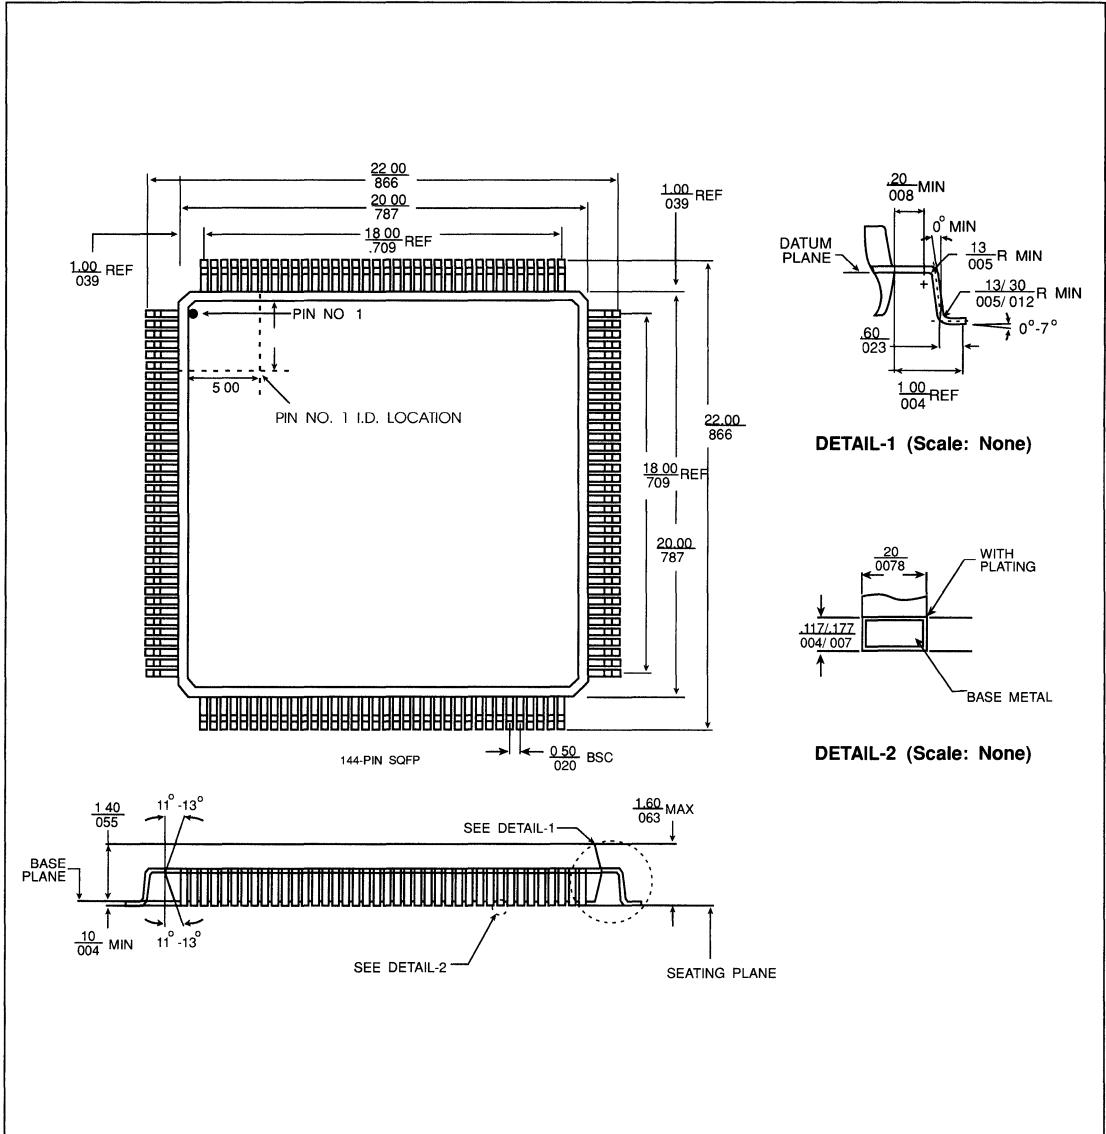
WD7625LV PACKAGE DIMENSIONS
